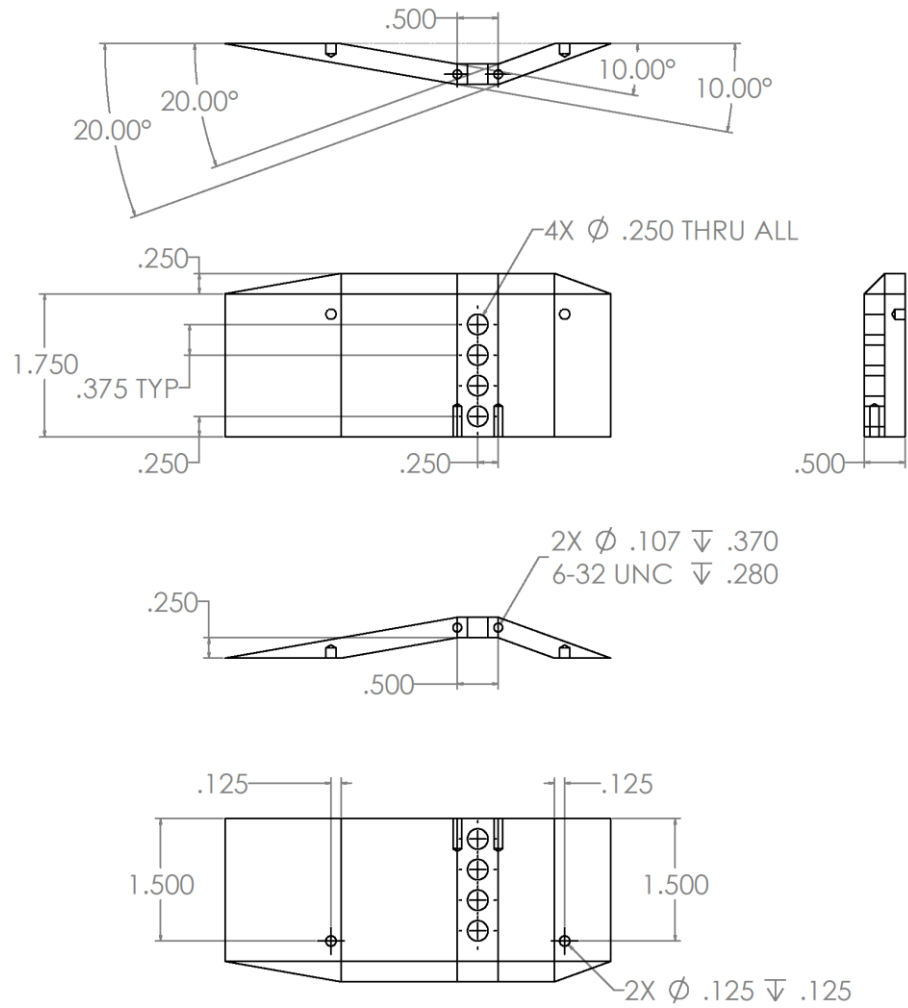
Drawing of Mach stem generator wedge model right outer strut.
